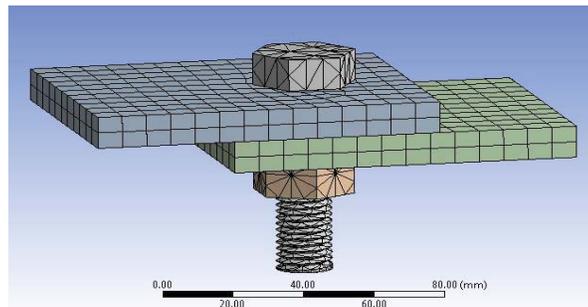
3D Mesh of M16 Nut Bolt assembly
